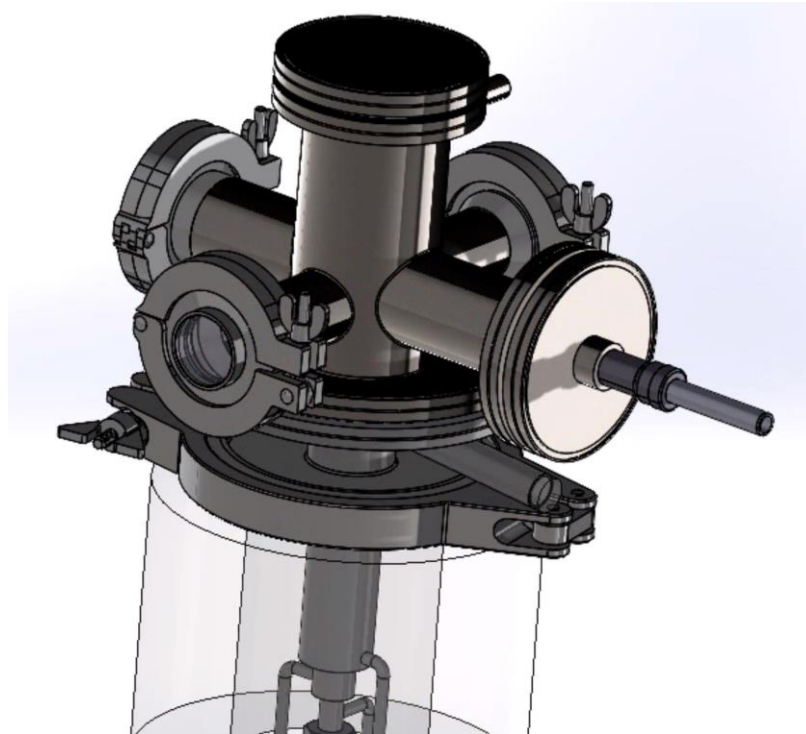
3D model of the FLAME burner with nozzle section and vacuum chamber.
